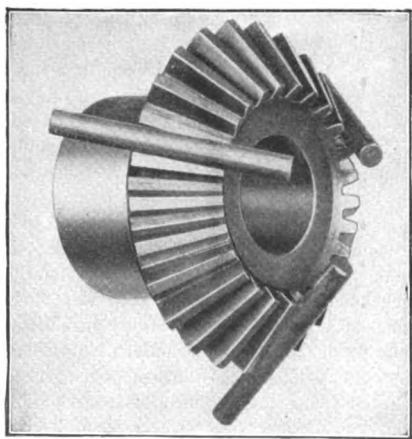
BEVEL-GEAR GRINDING CHUCK
